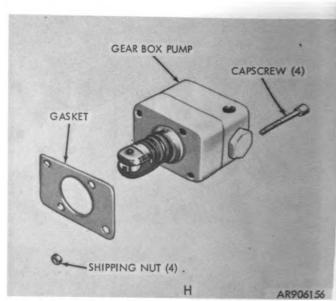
Traversing gearbox pump disassembly or assembly (2 of 2).
